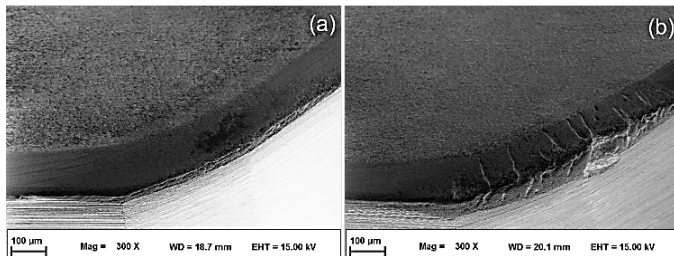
The worn tool geometry after 10 machining passes at cutting condition (a) B and (b) C shown in Table 1.
